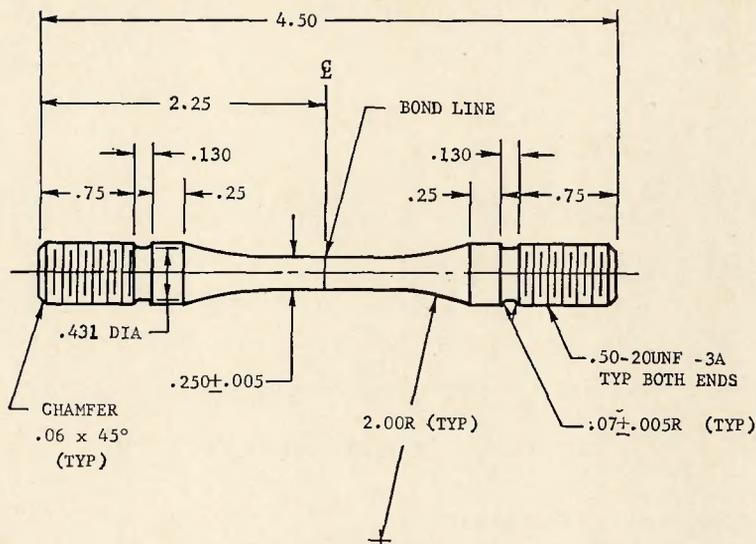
Butt-joint fatigue specimen. Notes: (1) all diameters concentric within .001; (2) finish machine with a sharp tool and light cuts to prevent bending, overheating, and cold working; (3) polish reduced section in stages with emery paper from No. 0 to No. 000 (do not buff)
